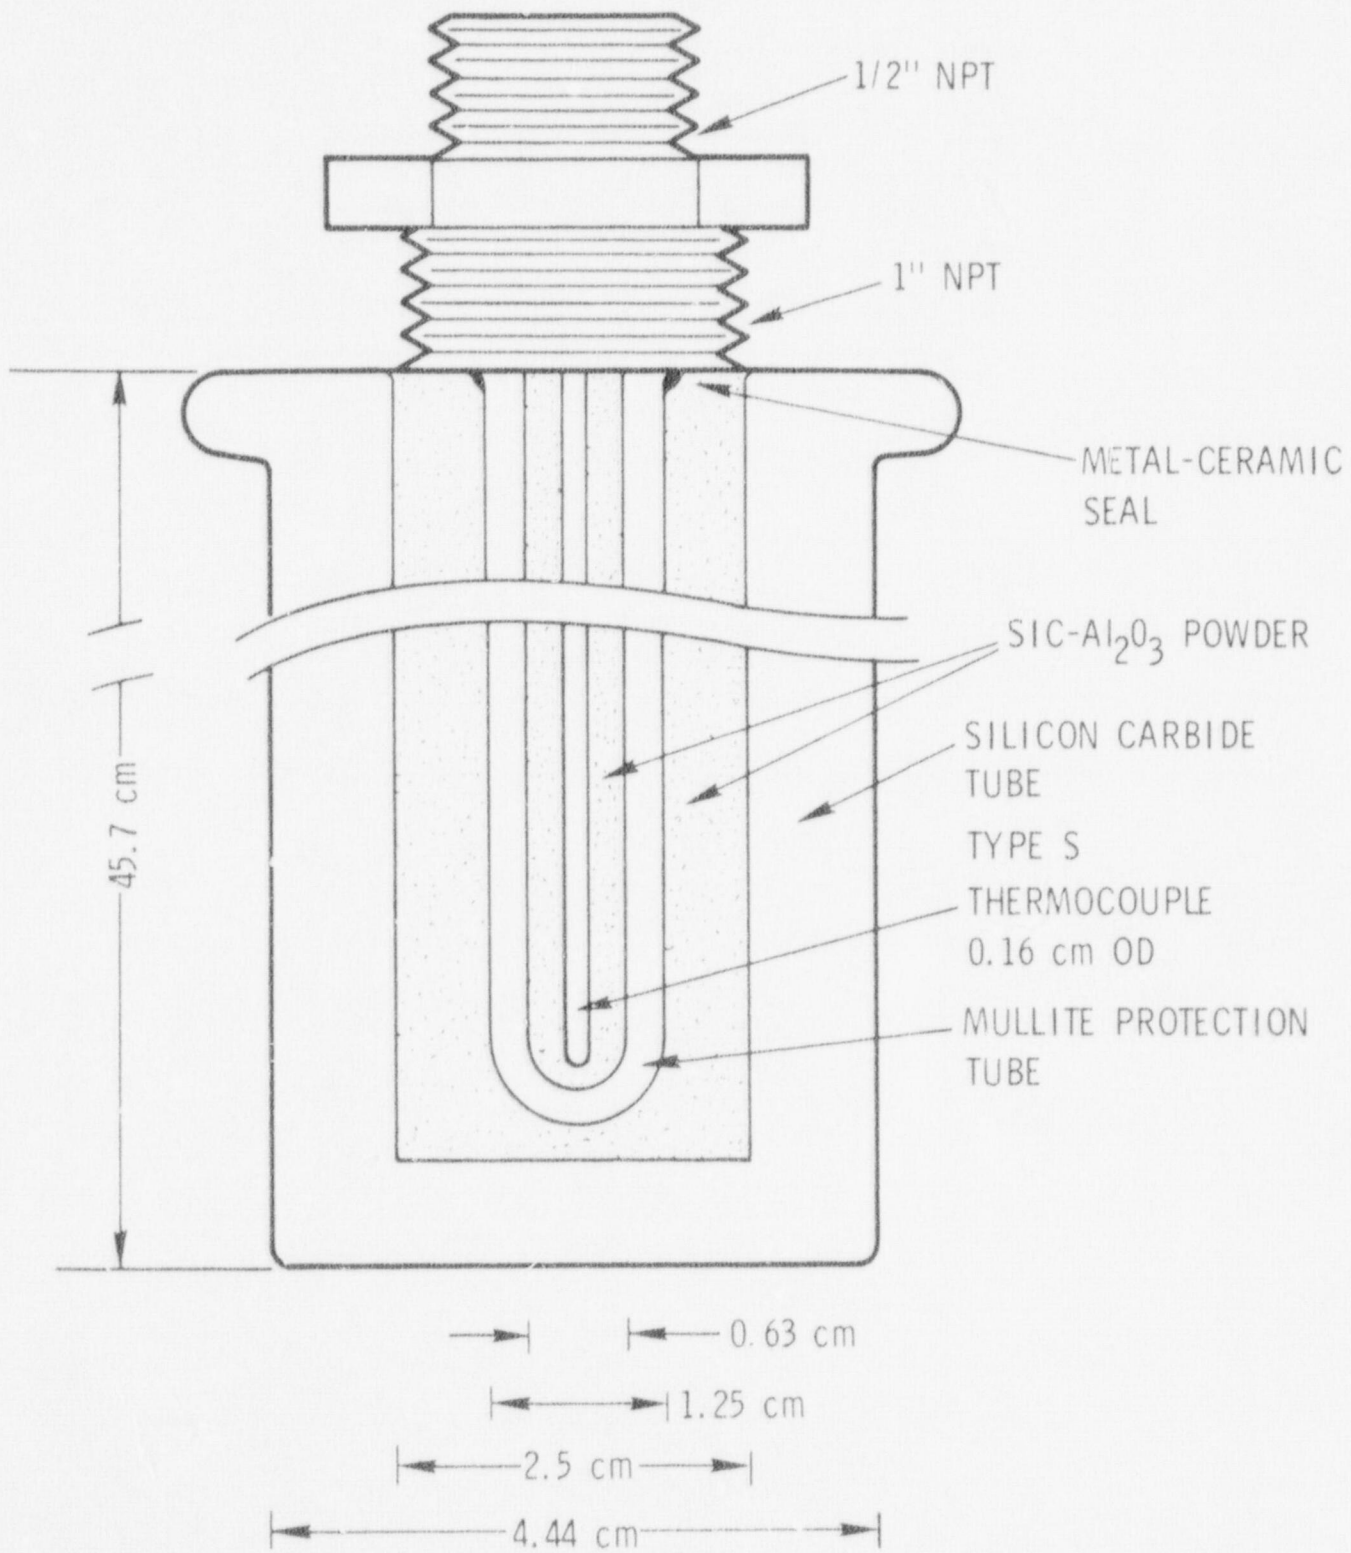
IN SITU THERMOCOUPLE ASSEMBLY.
